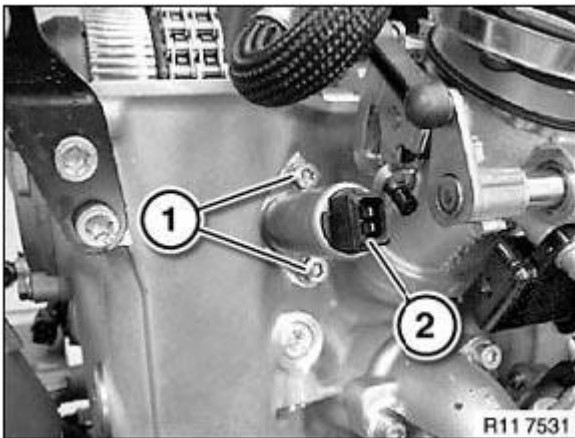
Identifying Screws And Inlet Solenoid Valve
